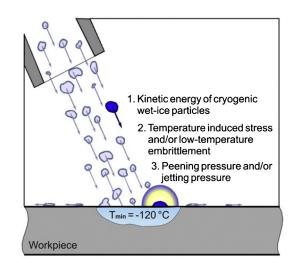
Behaviour of solid wet-ice abrasive at the surface of a workpiece according to Ref. [13].
